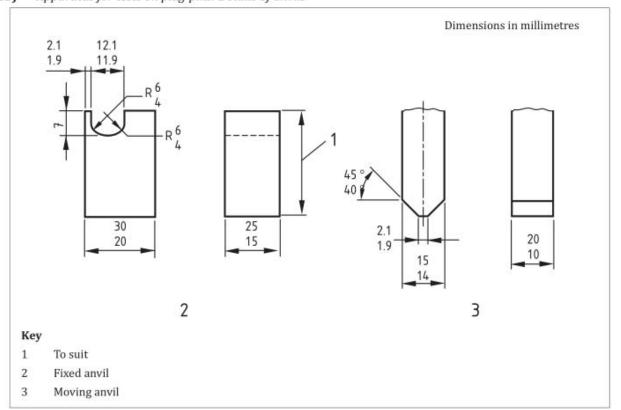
Apparatus for tests on plug pins: Details of anvils
